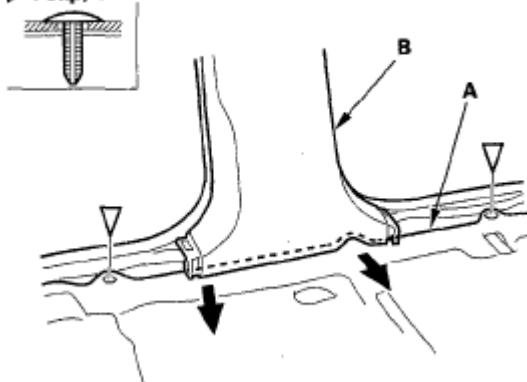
Identifying Edge Of Carpet And B-Pillar Lower Trim
